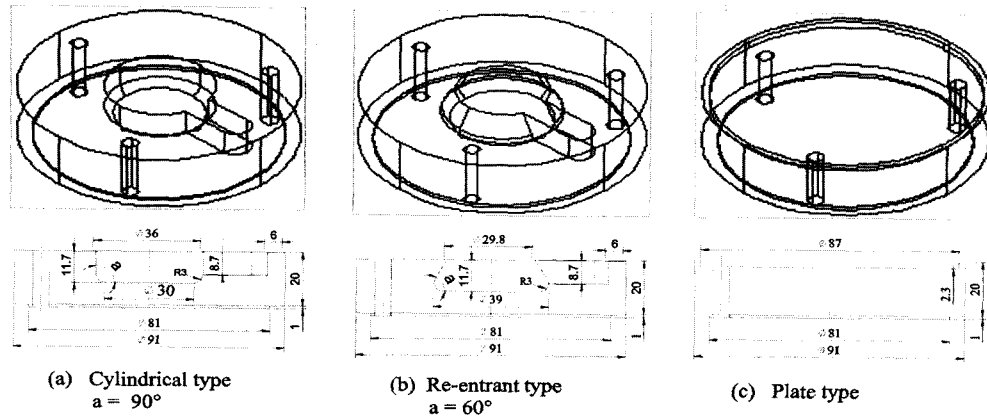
The schematic drawing of combustion chamber on experimental engine
